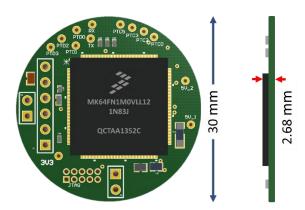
Illustrates the PCB layout using Altium designer 16.1. The diameter of the board is 30 mm, the width is 2.68 mm, and the weight is less than 3g
